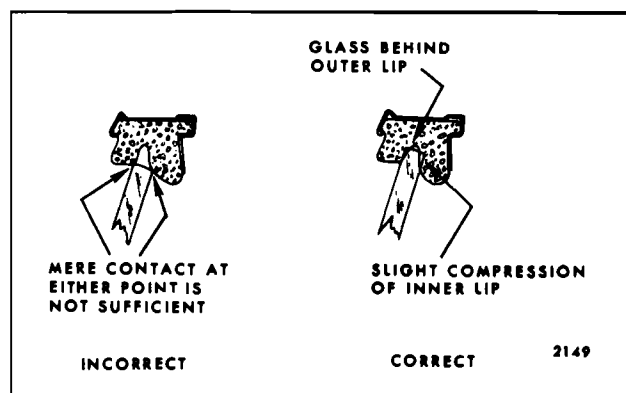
Window to Side Roof Rail Weatherstrip Alignment
